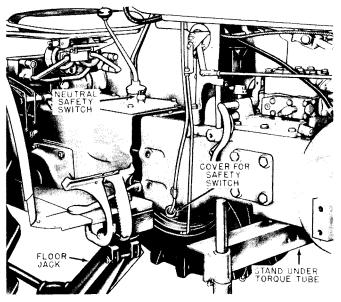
Splitting Tractor at Rear End of Torque Tube
